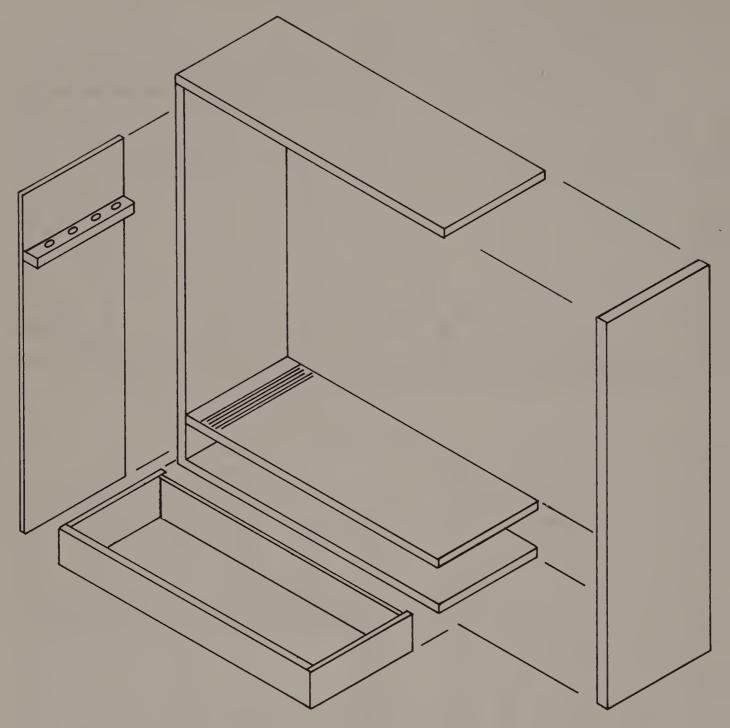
An exploded drawing shows the relation of each part to the other.
